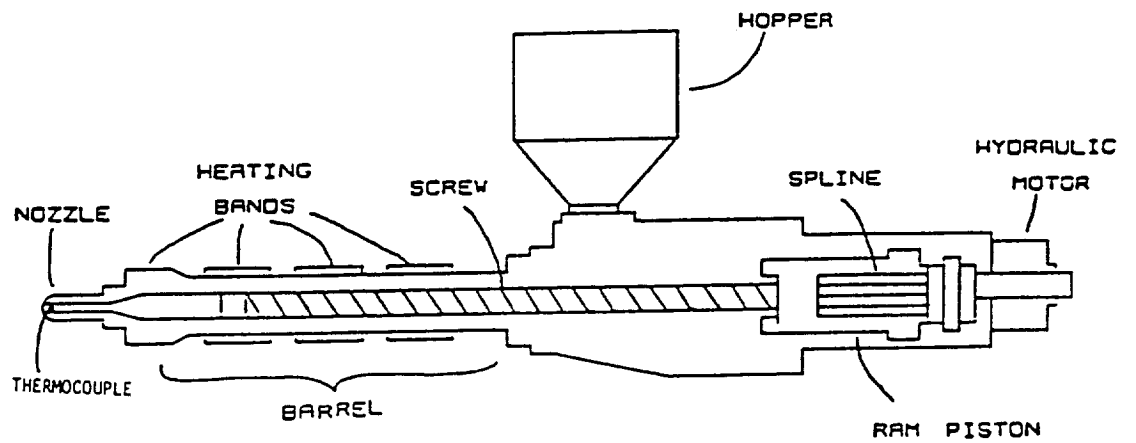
Cut-away View of a Reciprocating Screw Injection Molding Machine
